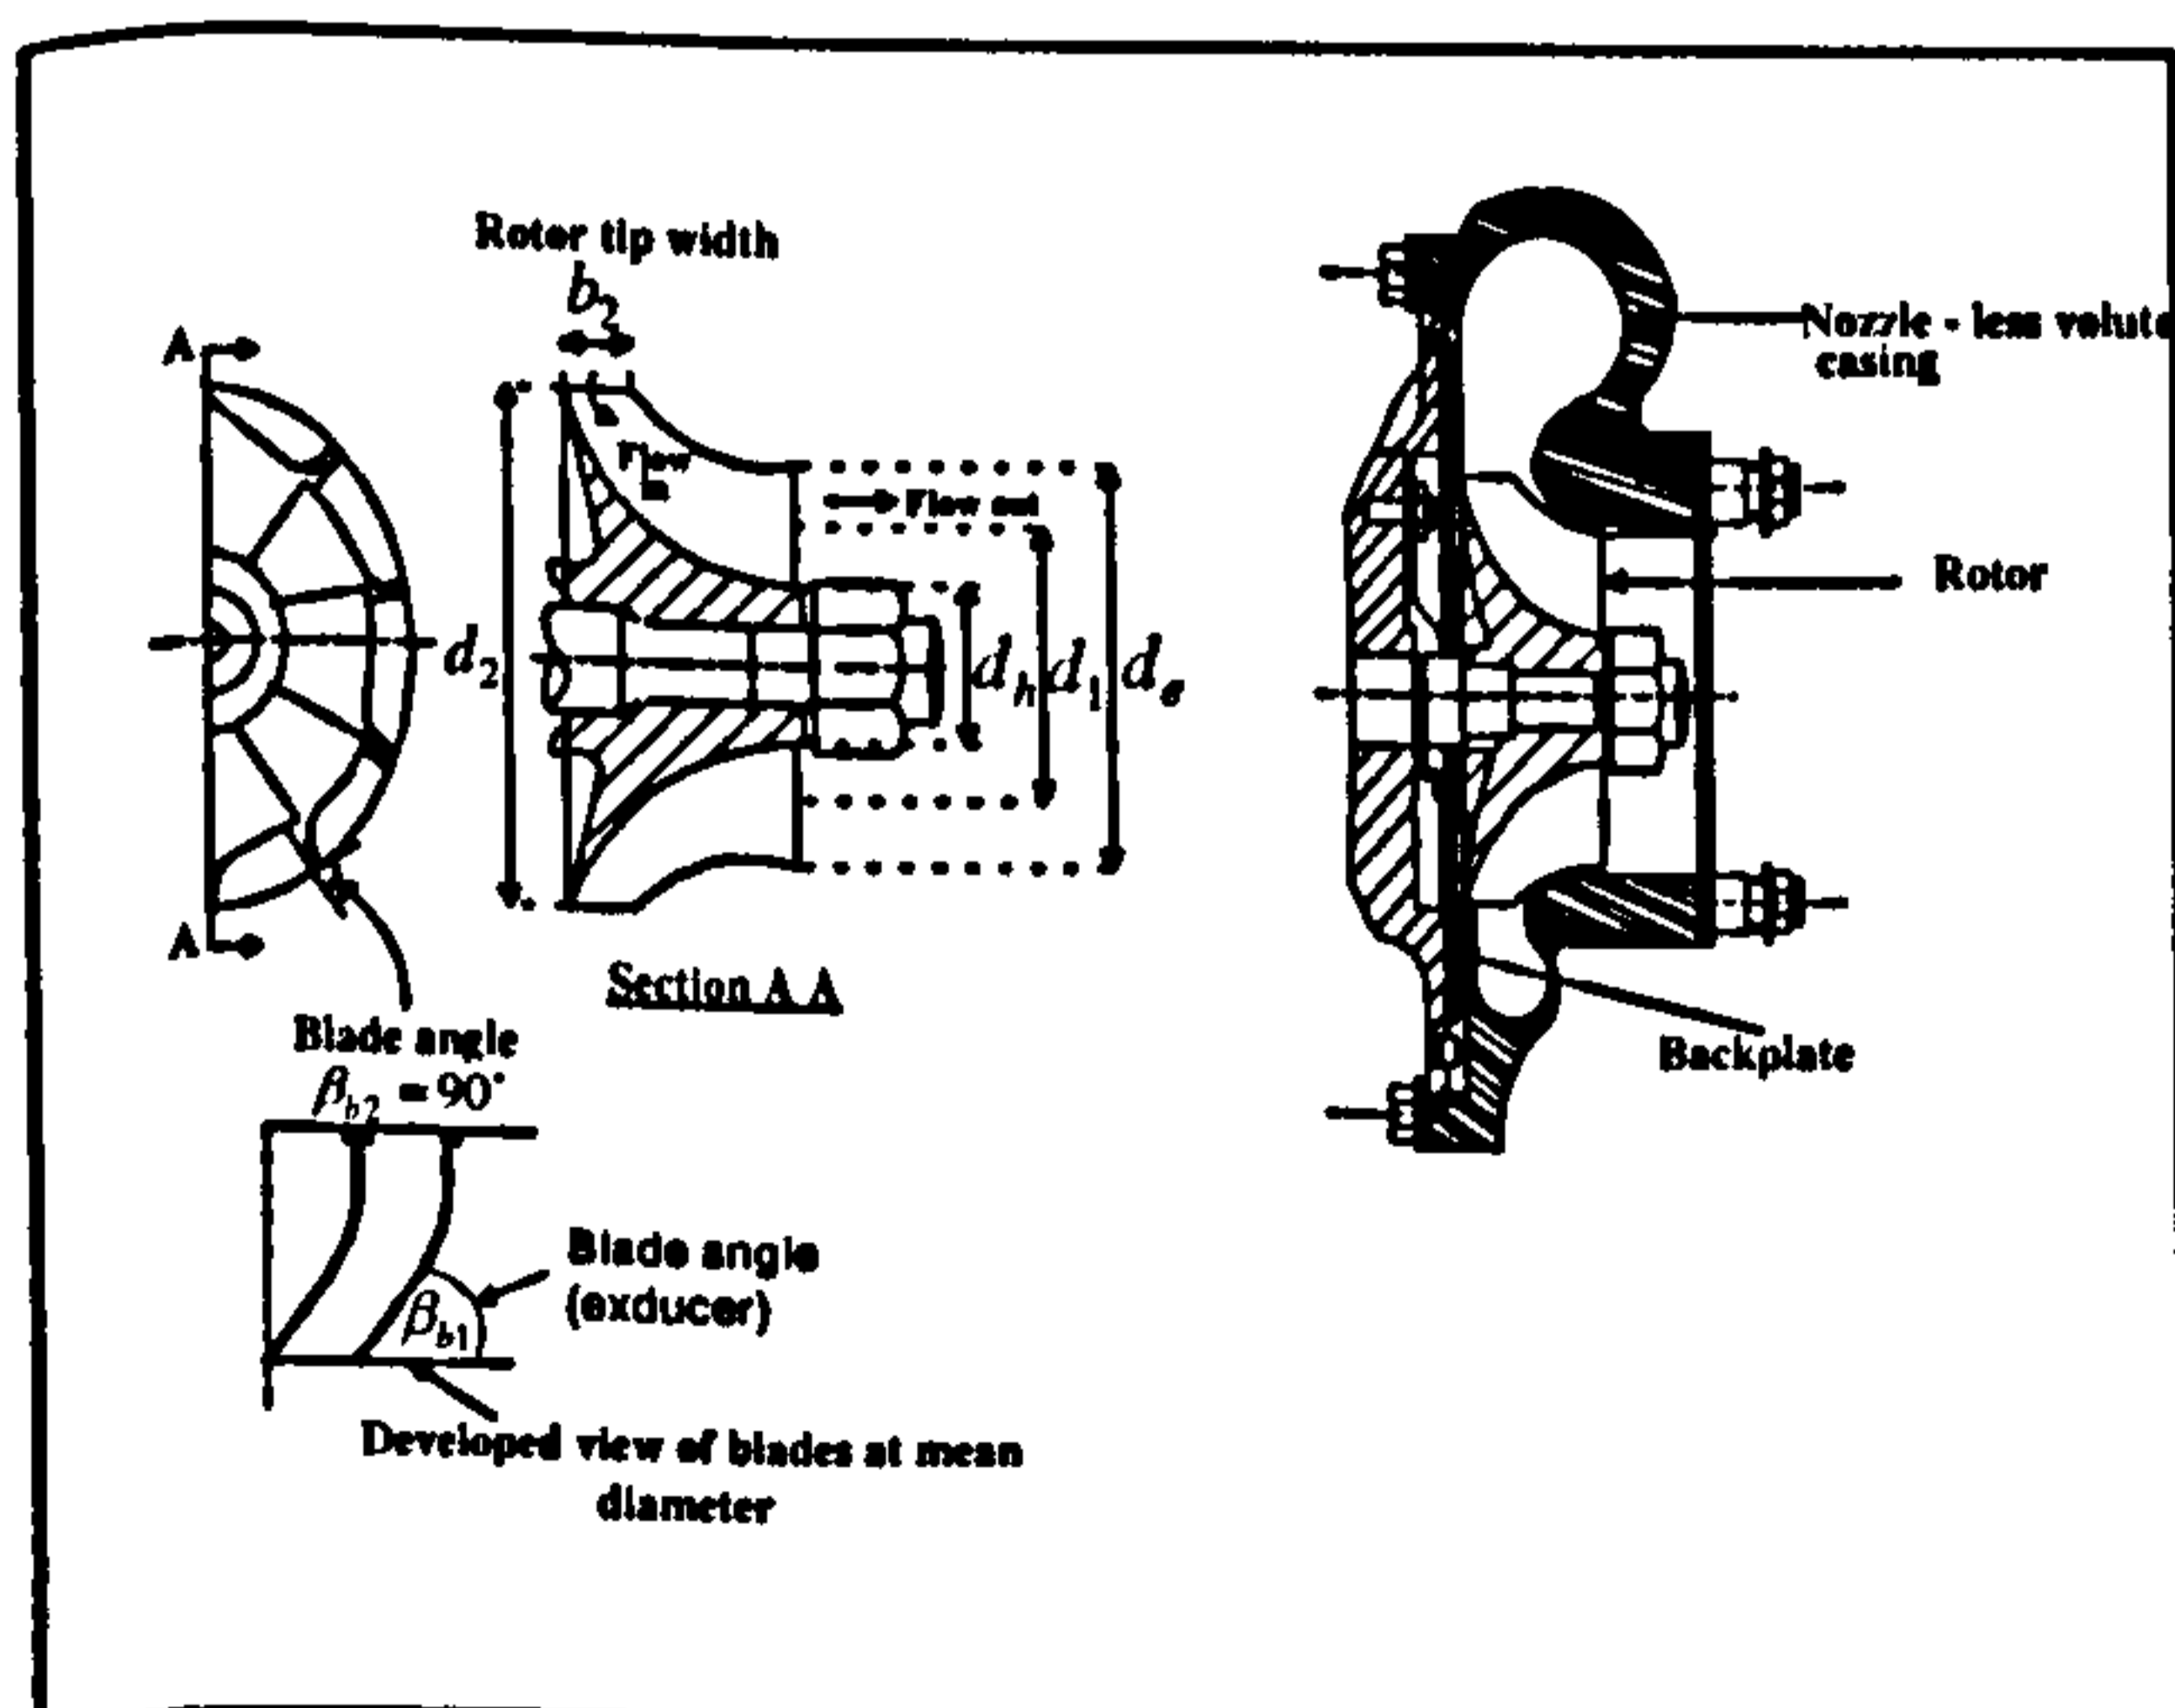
The geometrical shape and the principal dimensions of the IFR gas turbine
